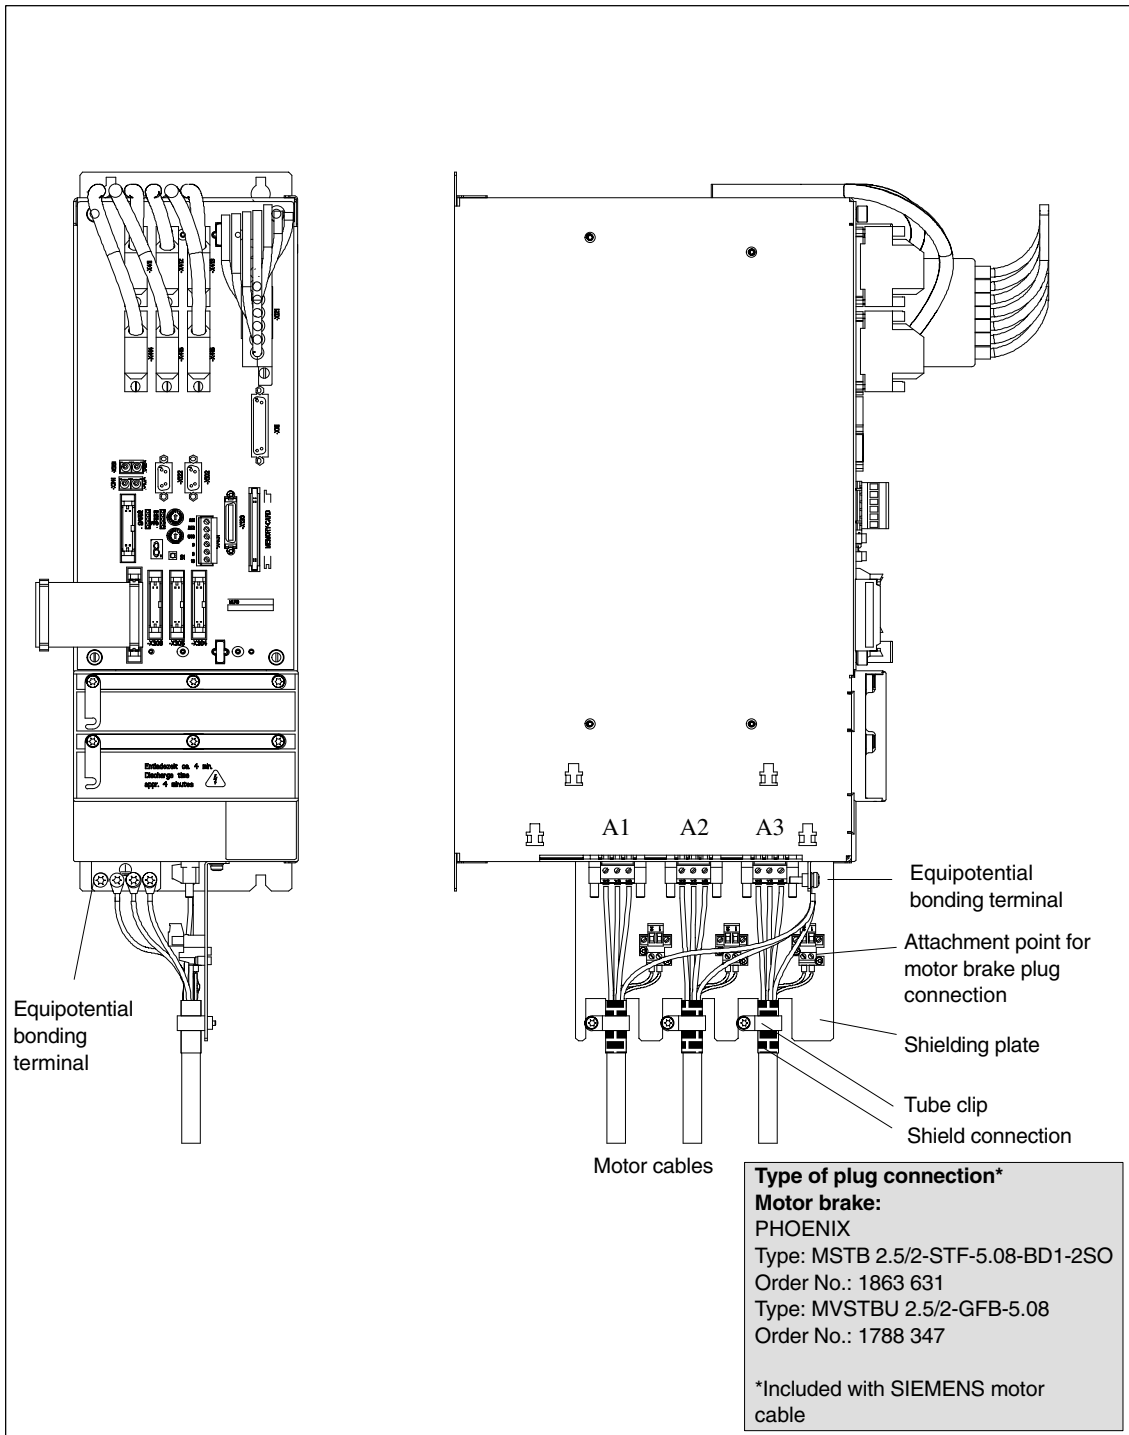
Terminal for motor and encoder cables (3-axis CCU box)
